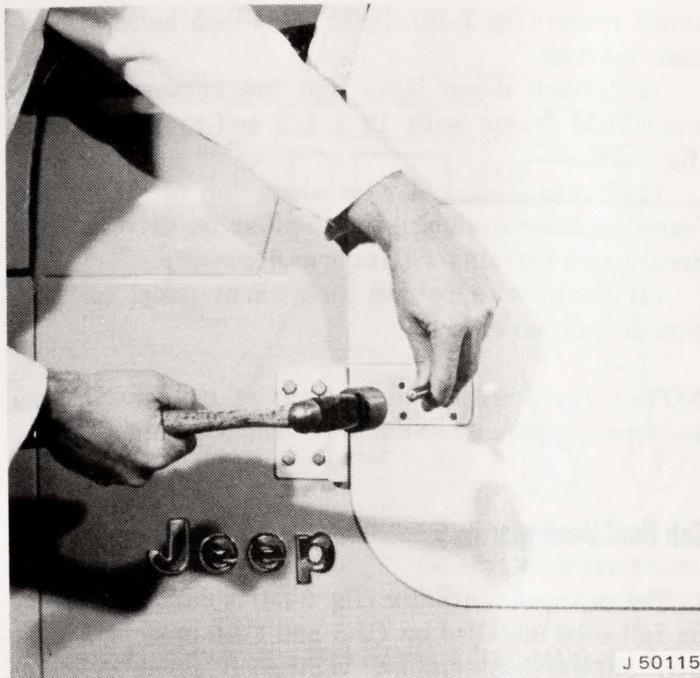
Marking Locations for Lower Hinge Female-Half Hole
